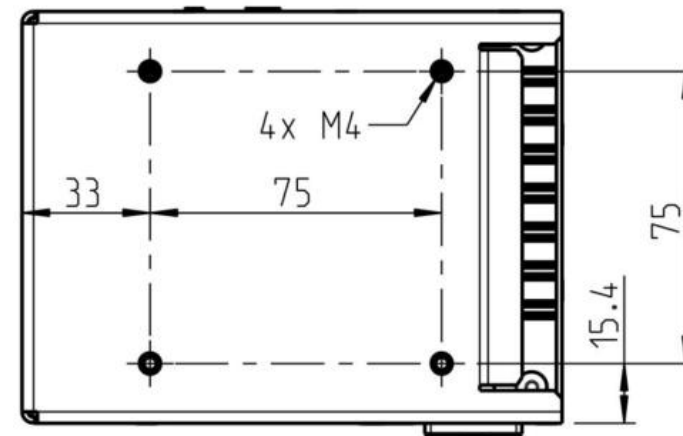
Dimensions bottom side, values [mm] – open-frame
